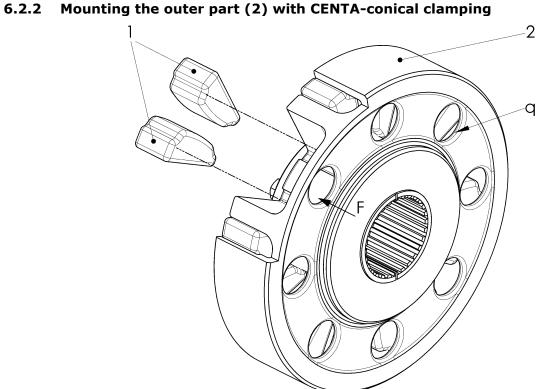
Preparing the outer part (2) with CENTA-conical clamping for mounting
